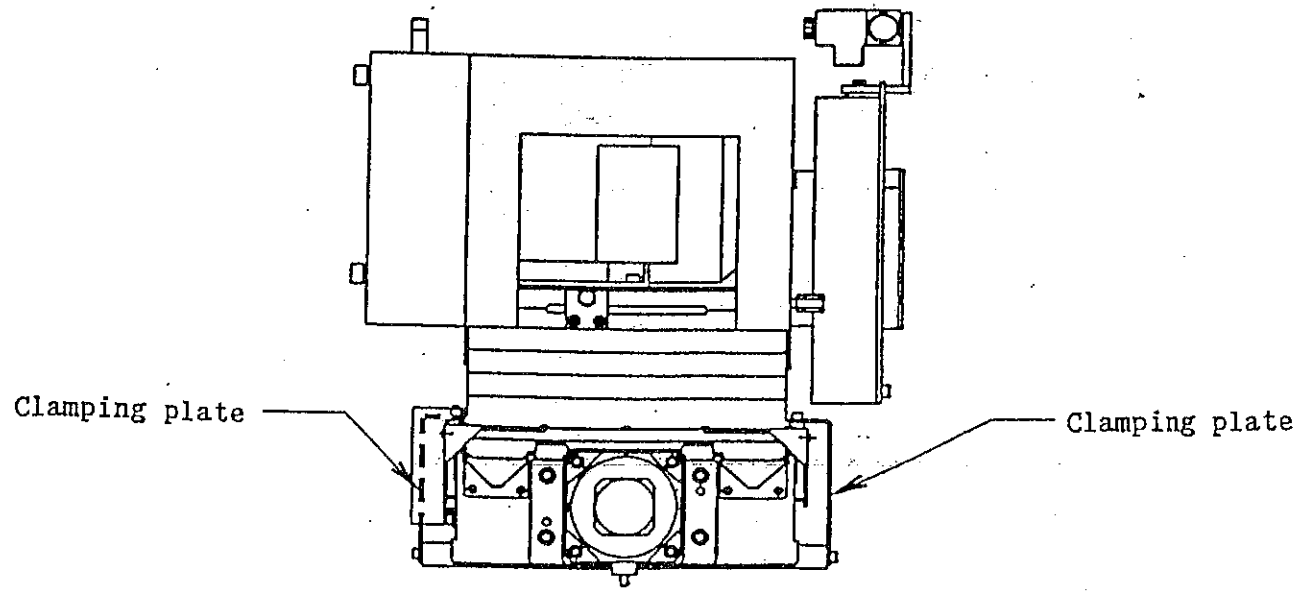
Wheel Spindle Base and Saddle Rear
